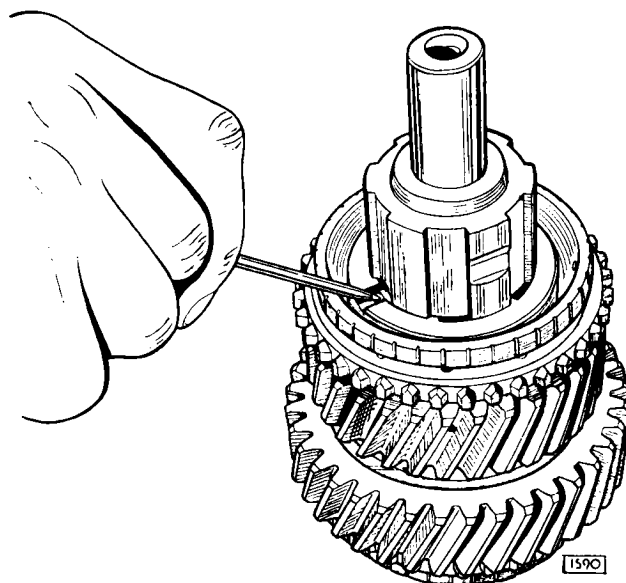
Depressing the 3rd speed thrust washer locking plunger.
